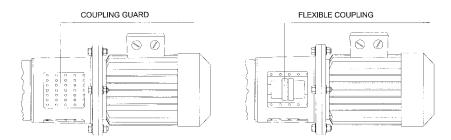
CHECKING THE ALIGNMENT ON MONOBLOCK DESIGN
